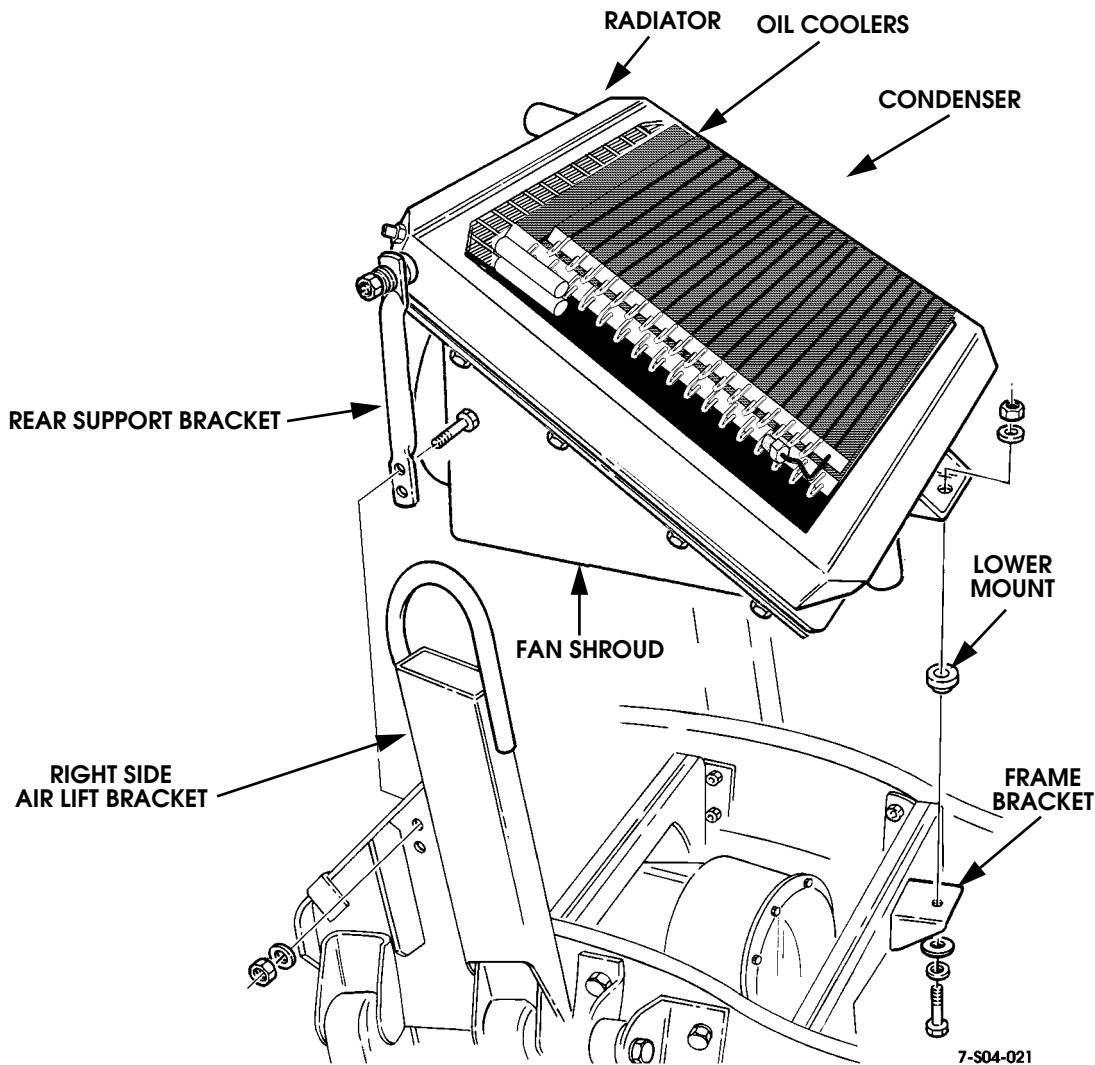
Radiator and Fan Shroud Assembly Breakdown
